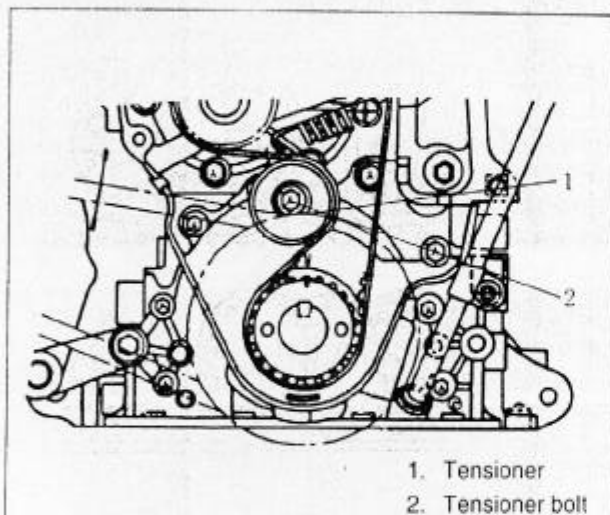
A—25 ATTACHMENT PARTS OF TENSIONER
